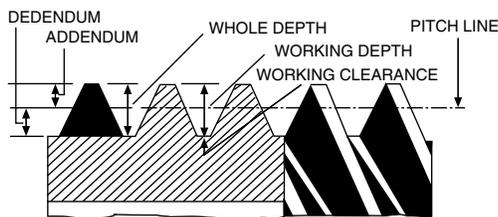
A, Drawing of Worm showing cross section and full view of the thread
